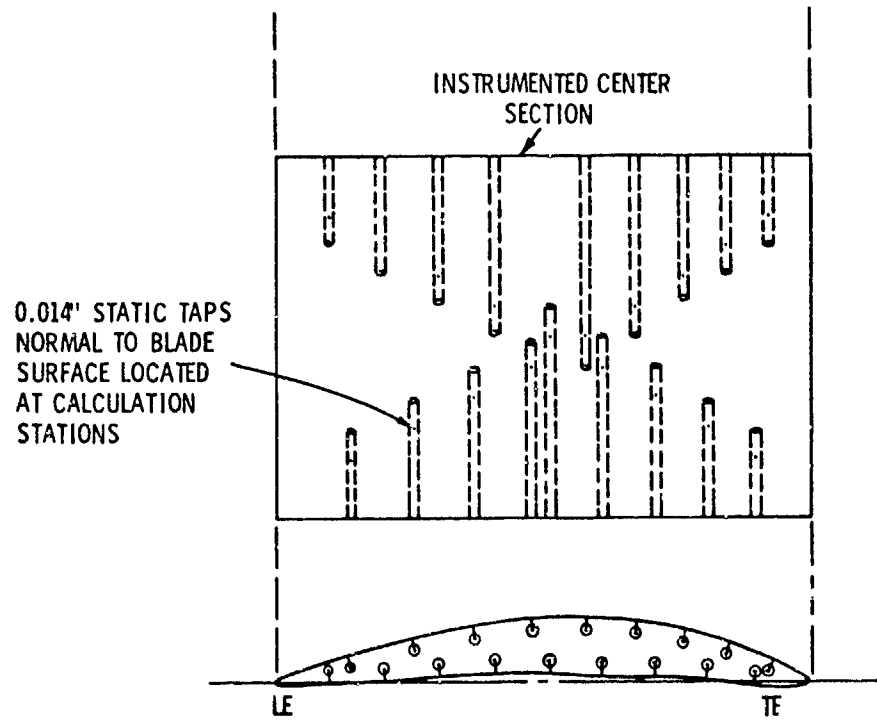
Detail of Airfoil Section Shape and Location of Holes for Surface Pressure Measurements.
